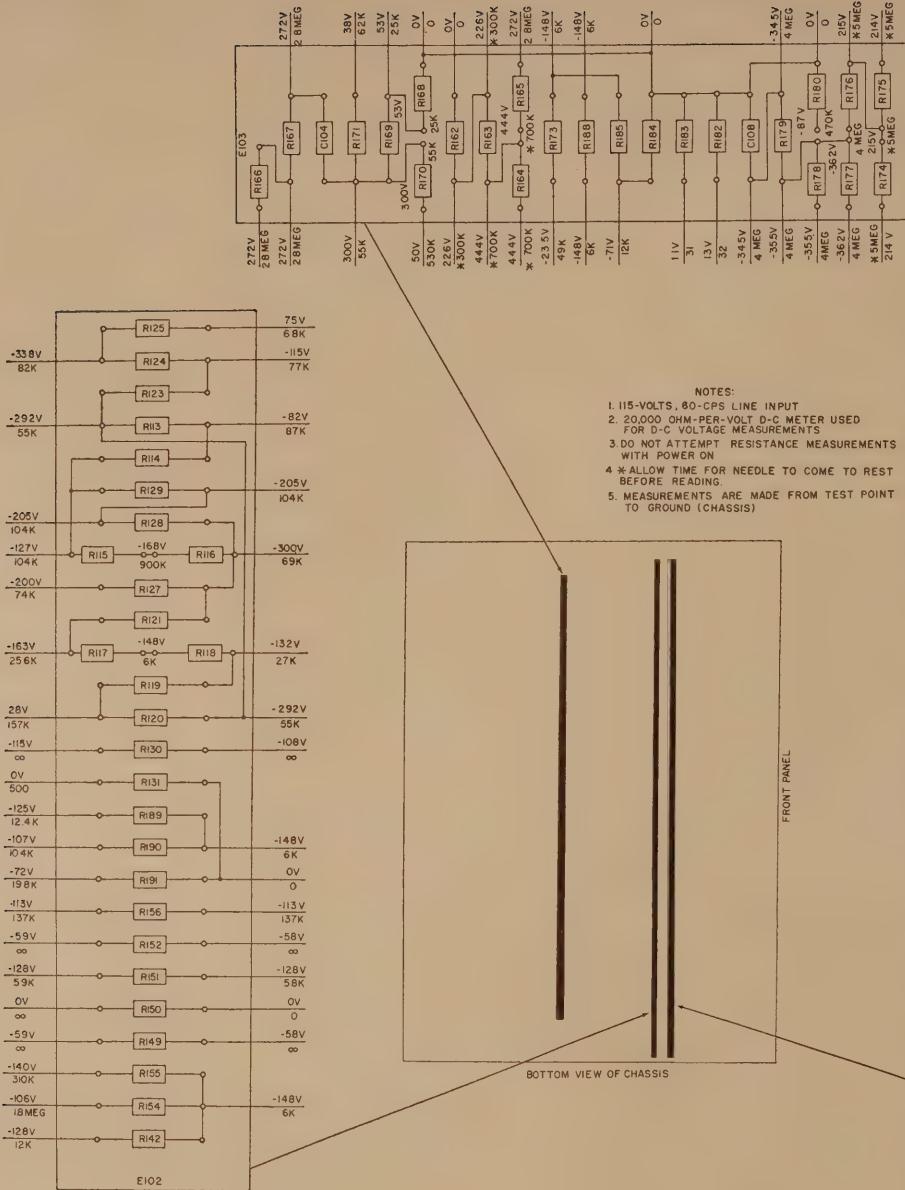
Control Unit C-292B/TRA-7 chassis terminal boards and identification of parts.
